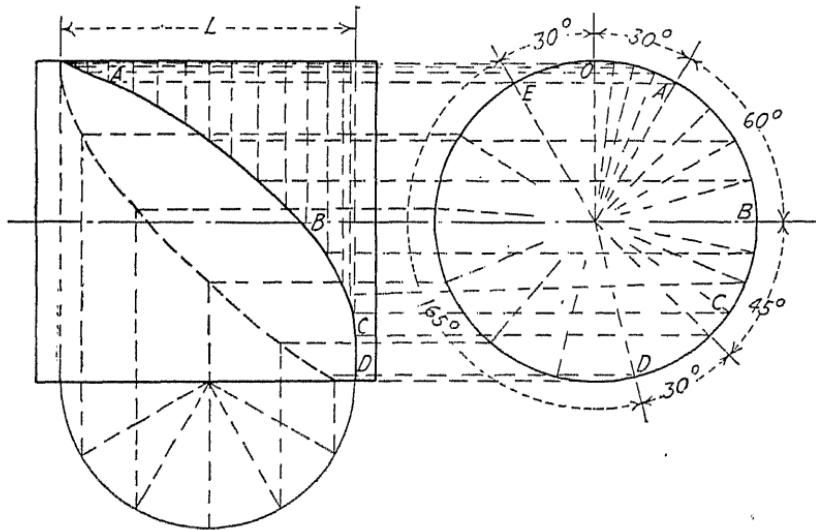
Layout of the center line of the groove of a cylindrical cam.
